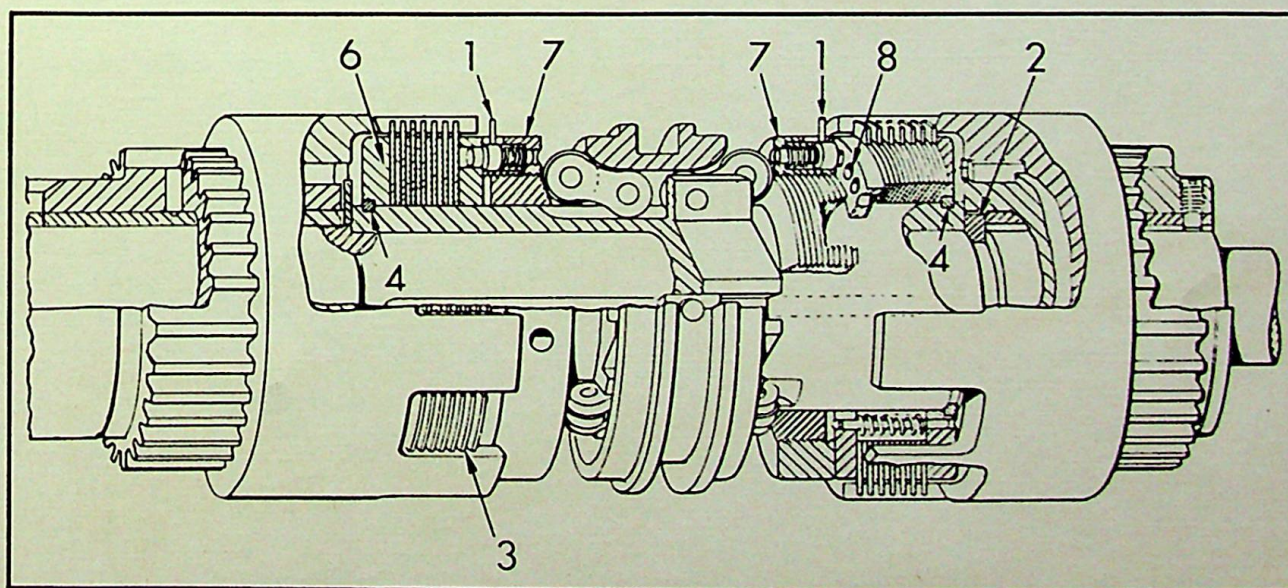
The Twin Disc Clutch for No. 4 and No. 5 Turret Lathes
